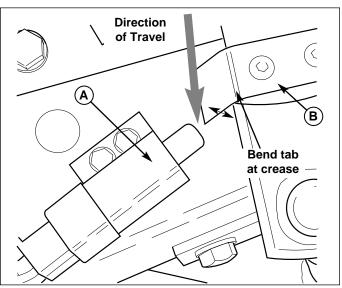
Brake Switch Adjustment A. Brake Switch B. Tab
